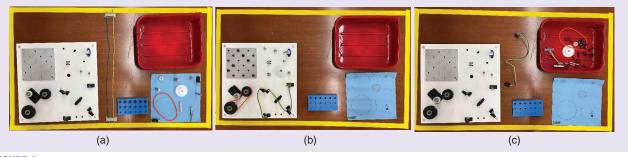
An example of the manufacturing track task where the robot needs to assemble each part on one quadrant at a time of the given board and then disassemble the parts into a bin. (a) Initial state, disassembled. (b) Complete assembly. (c) Final state, disassembled.
